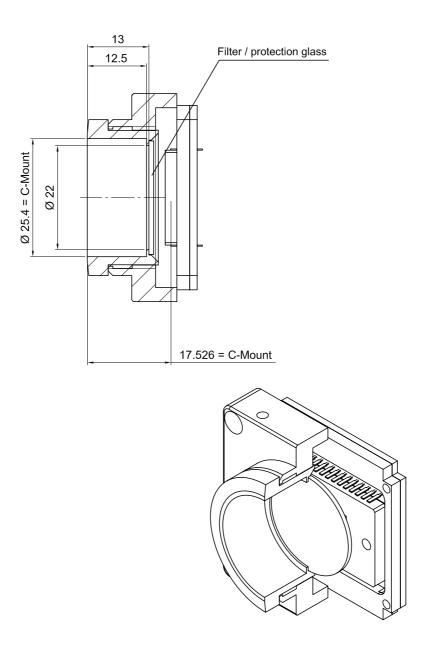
Pike C-Mount dimensions (large filter for Pike F-100, F-145, F-210, F-421, F-505)
